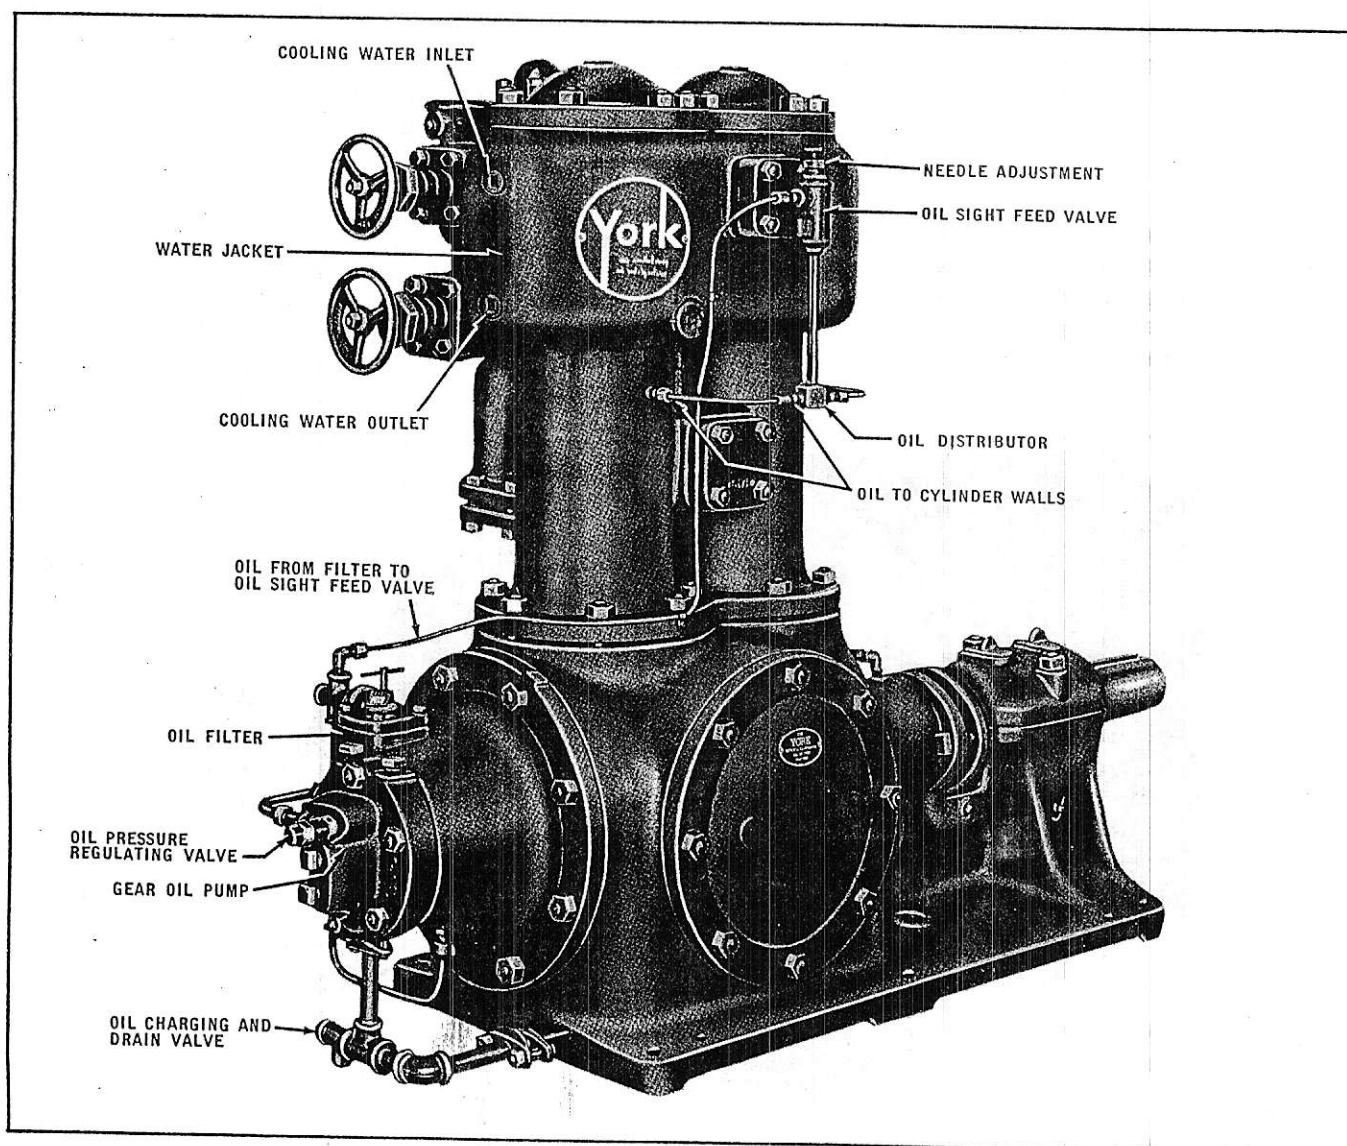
Cylinder Wall Lubrication - 6" to 9" Compressors
